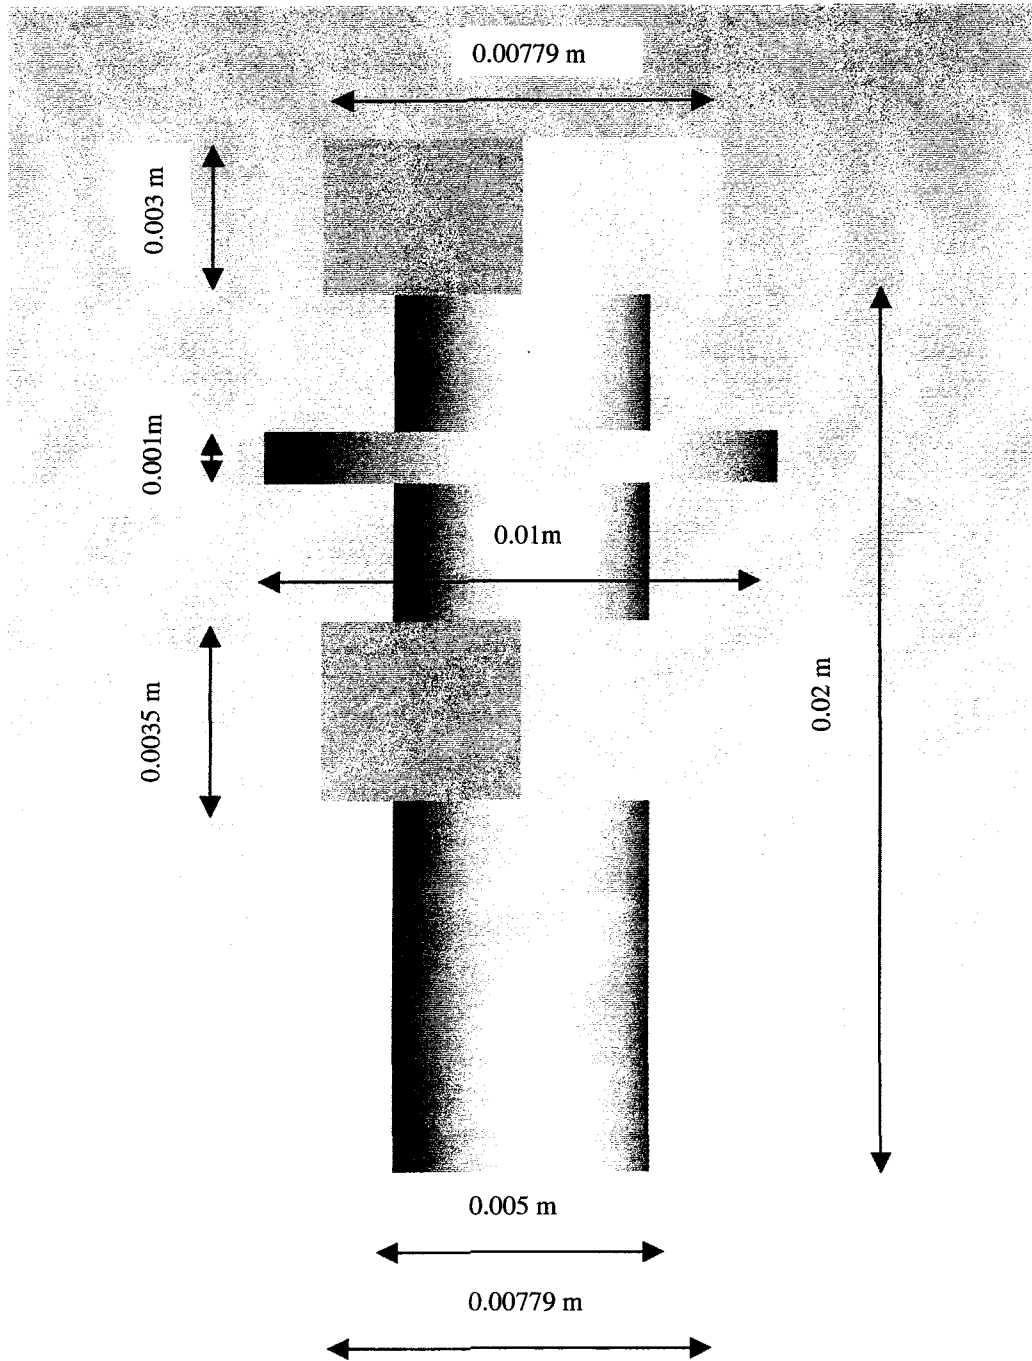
Dimensions of the nut, bolt and washer used in the joint of the double hat sections.
